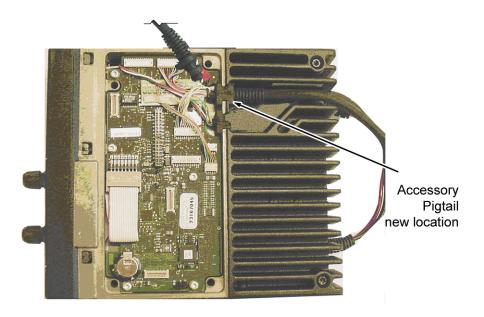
RS5300 Accessory Pigtail Cable Relocation
